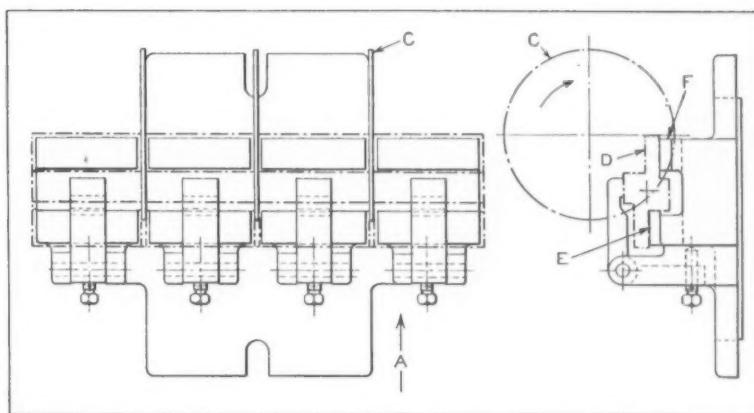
Fixture Employed in Holding Milled Bar while it is being Cut into Four Parts by the Three Saws *C
